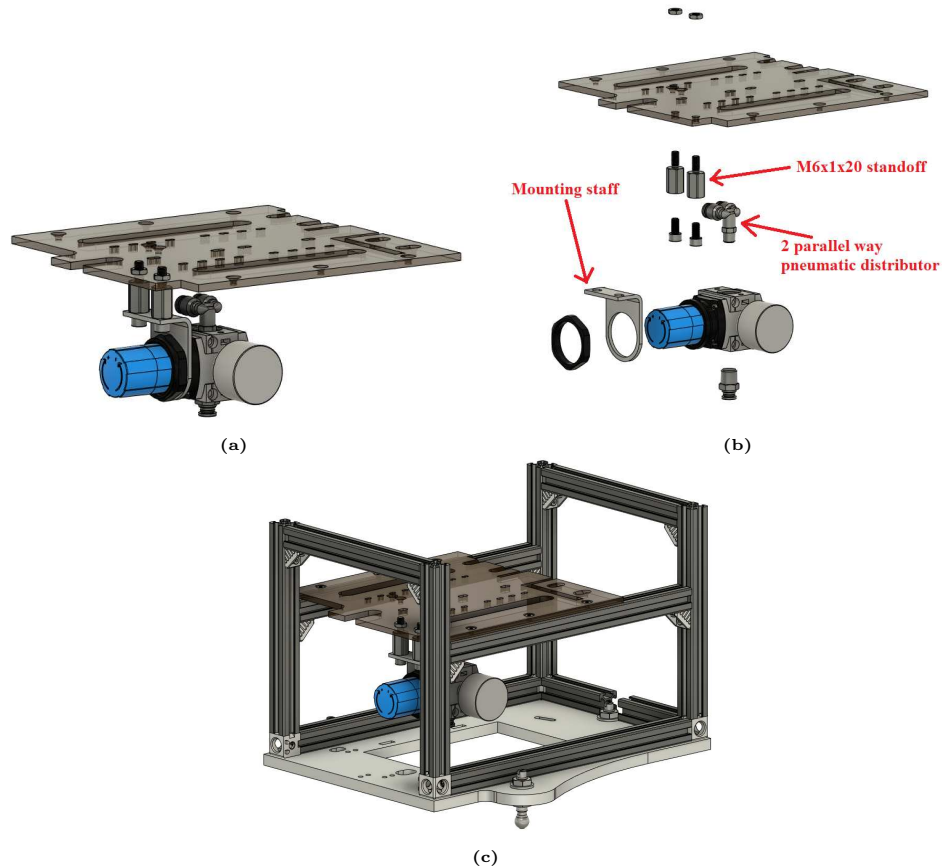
(a) Mounted pressure regulator, (b) exploded view and (c) detail with the main structural frame.
